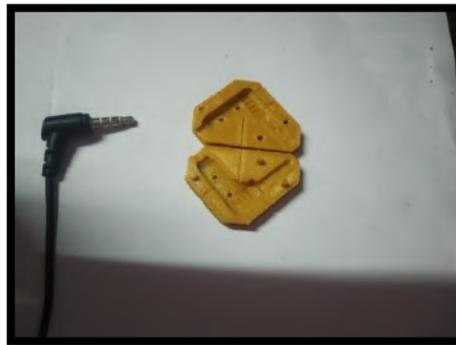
3D printed Mould Compared To the Industrial Commercial Specimen
